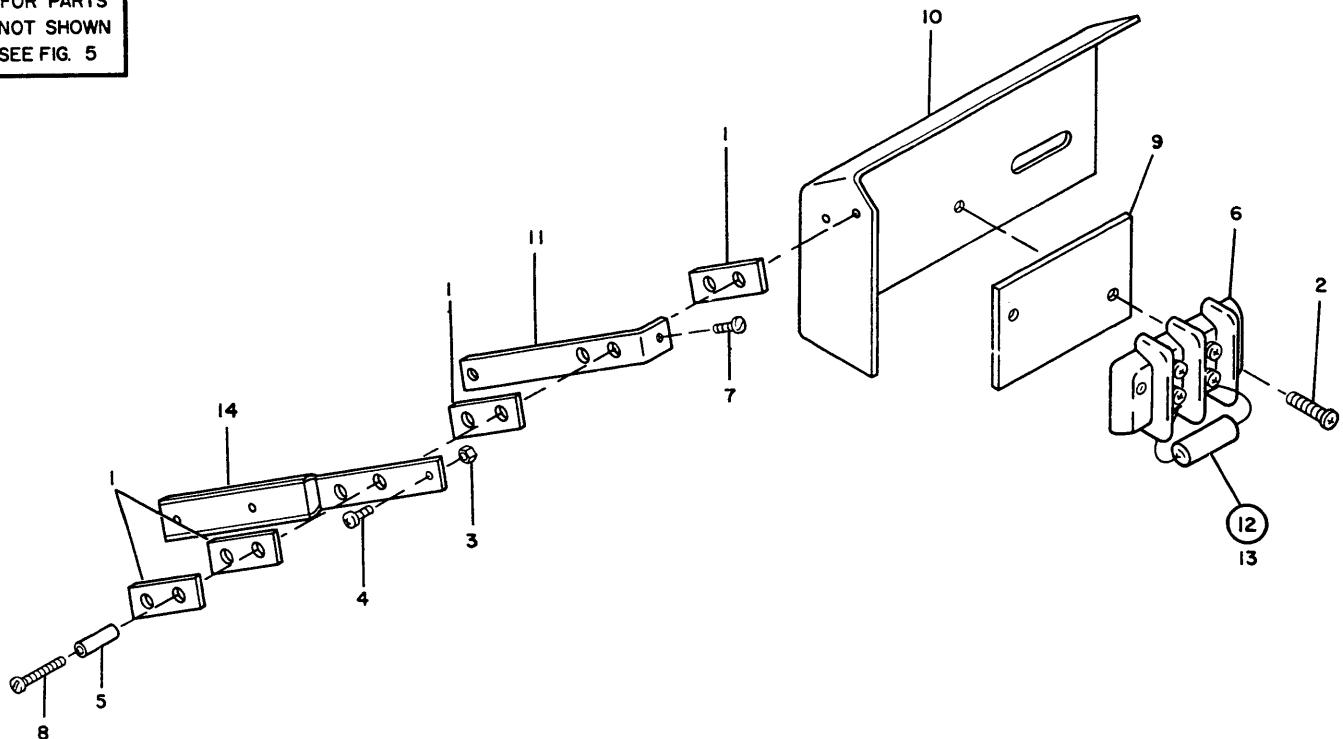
A. PACK-IN-PLACE SWITCH ASSEMBLY. SEE LIST 5A.
